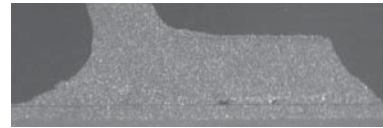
Example of solder joint cross-section after 1,000 cycles of heat shock testing.
